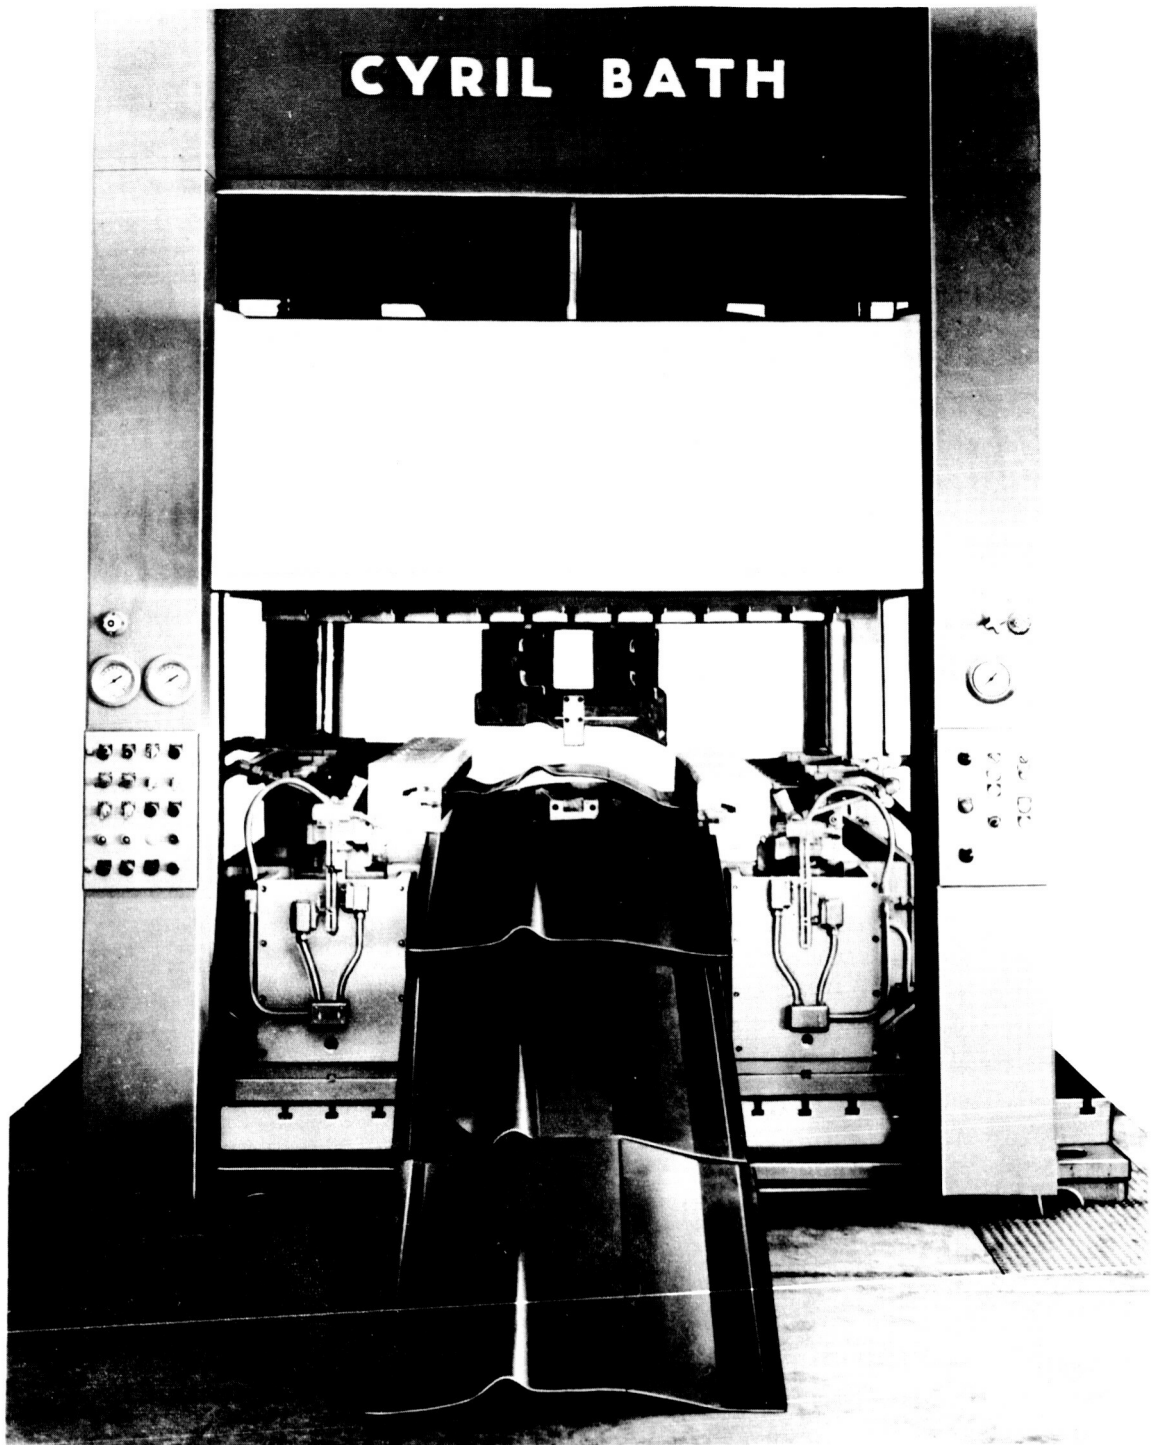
STRETCH-DRAW-PROCESS MACHINE FOR SHEET
